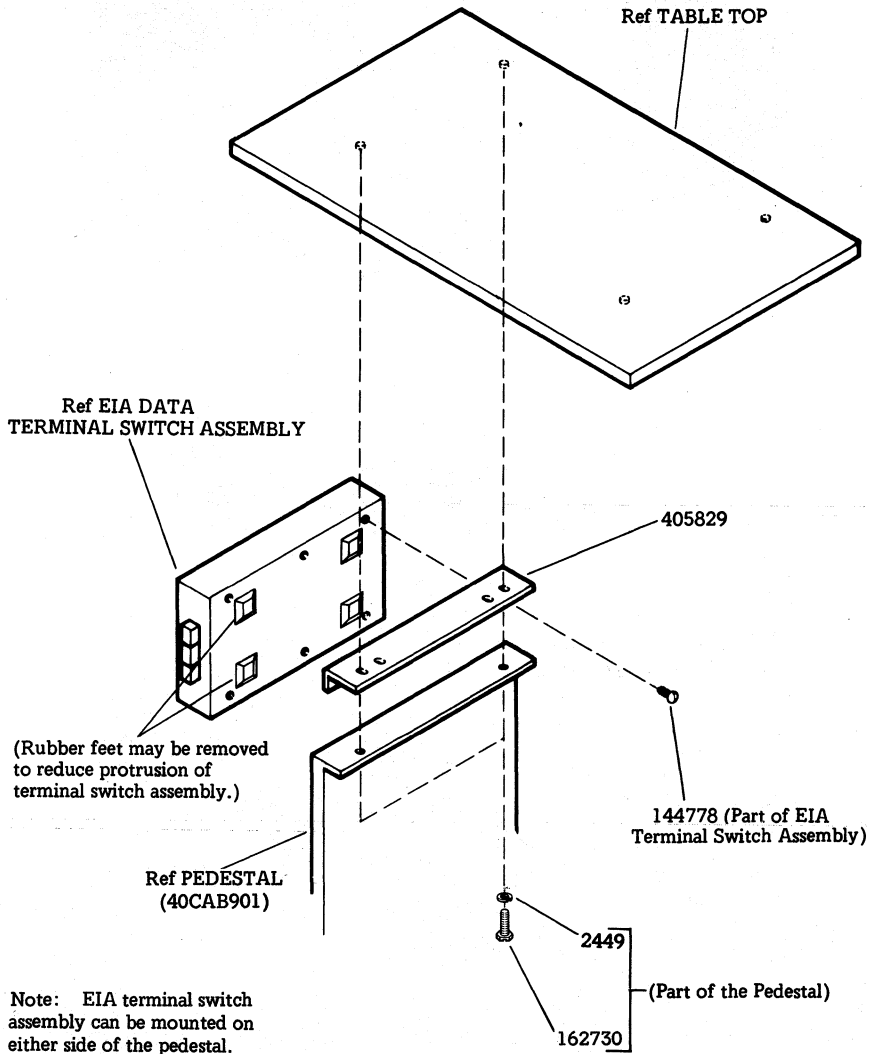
Mounting for the 345630 EIA Terminal Switch Assembly
